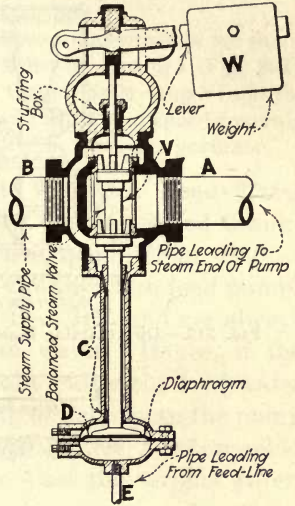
Sectional Elevation Of The Fulton Governor For Boiler-Feed Pumps.
